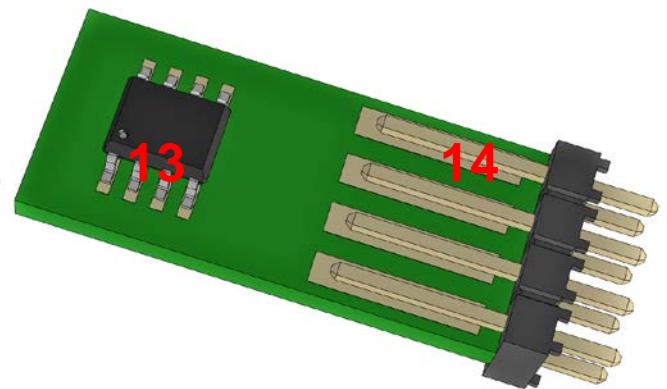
XY side PCB assembly ("2-pole 360 DEG" face)
